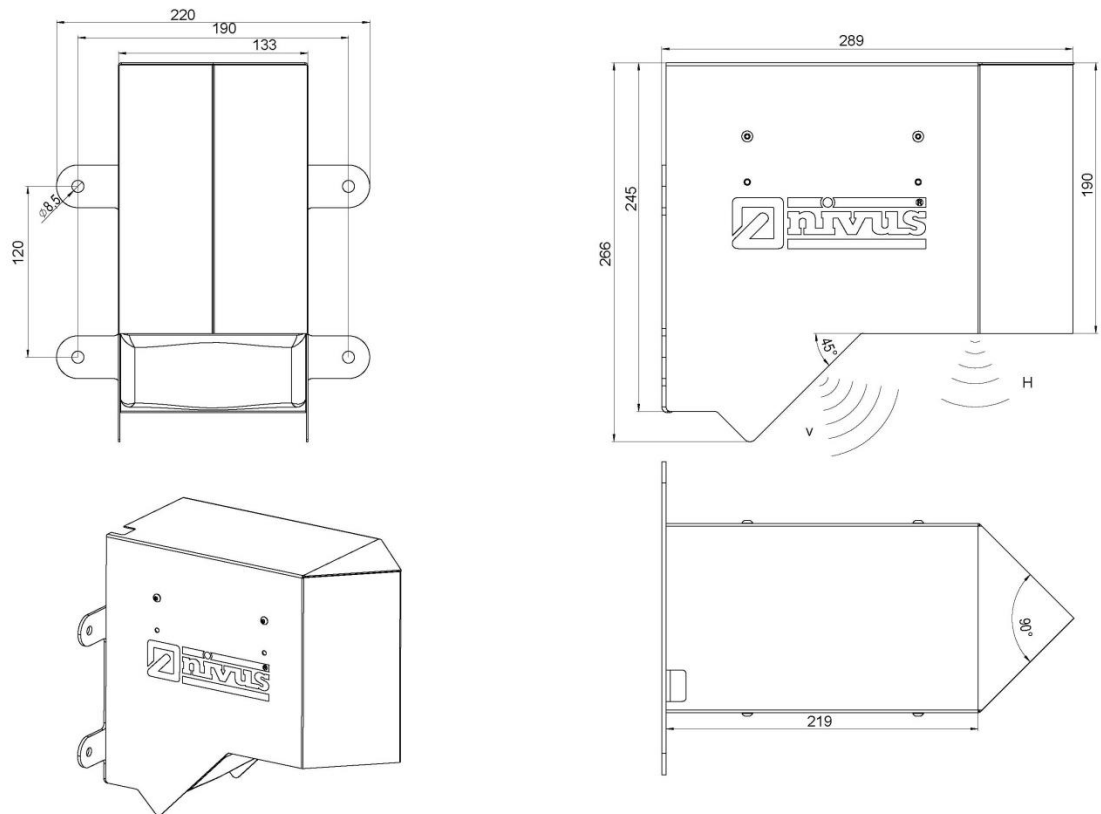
Measurements of enclosure for the types OFR-G00/EV0
